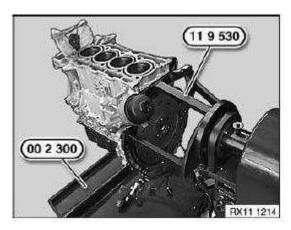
Identifying Special Tool (11 9 530 And 00 2 300) On Engine Block
